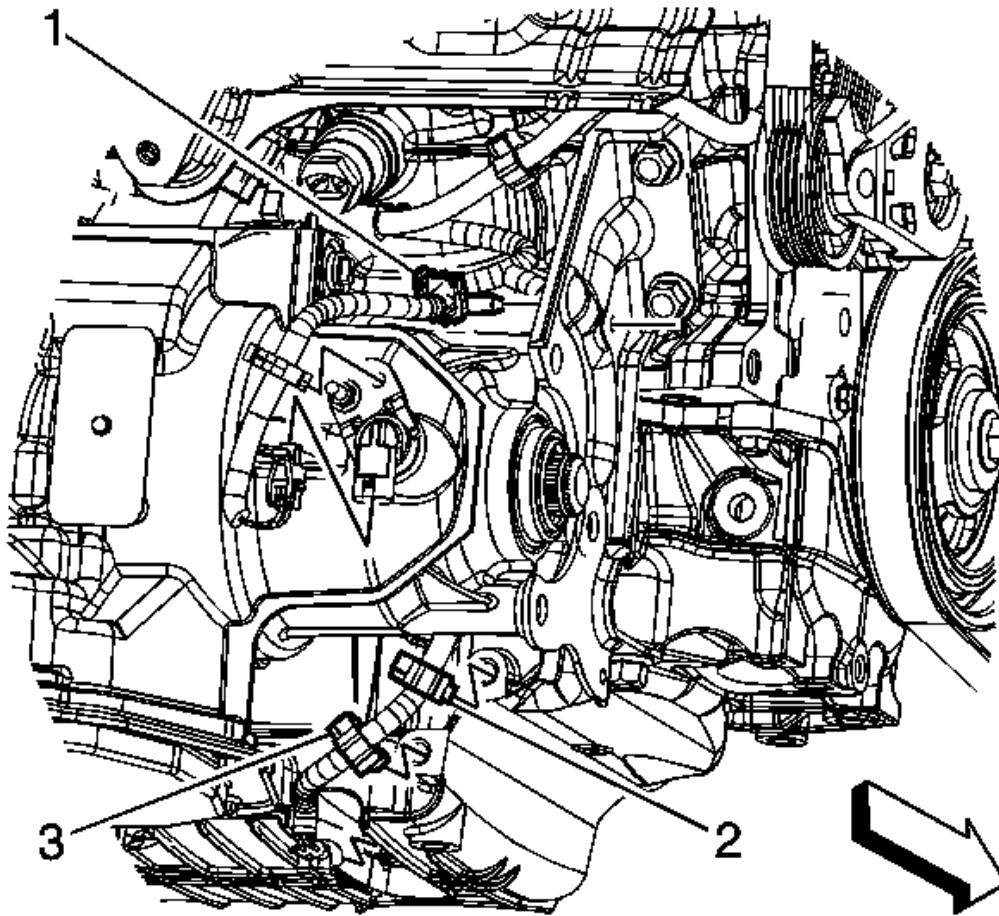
Identifying Engine Wiring Harness Clip & Nut (at Oil Pan)
